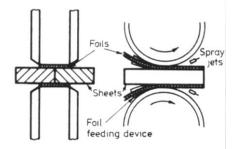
Foil seam resistance welding layout sketch [19]
